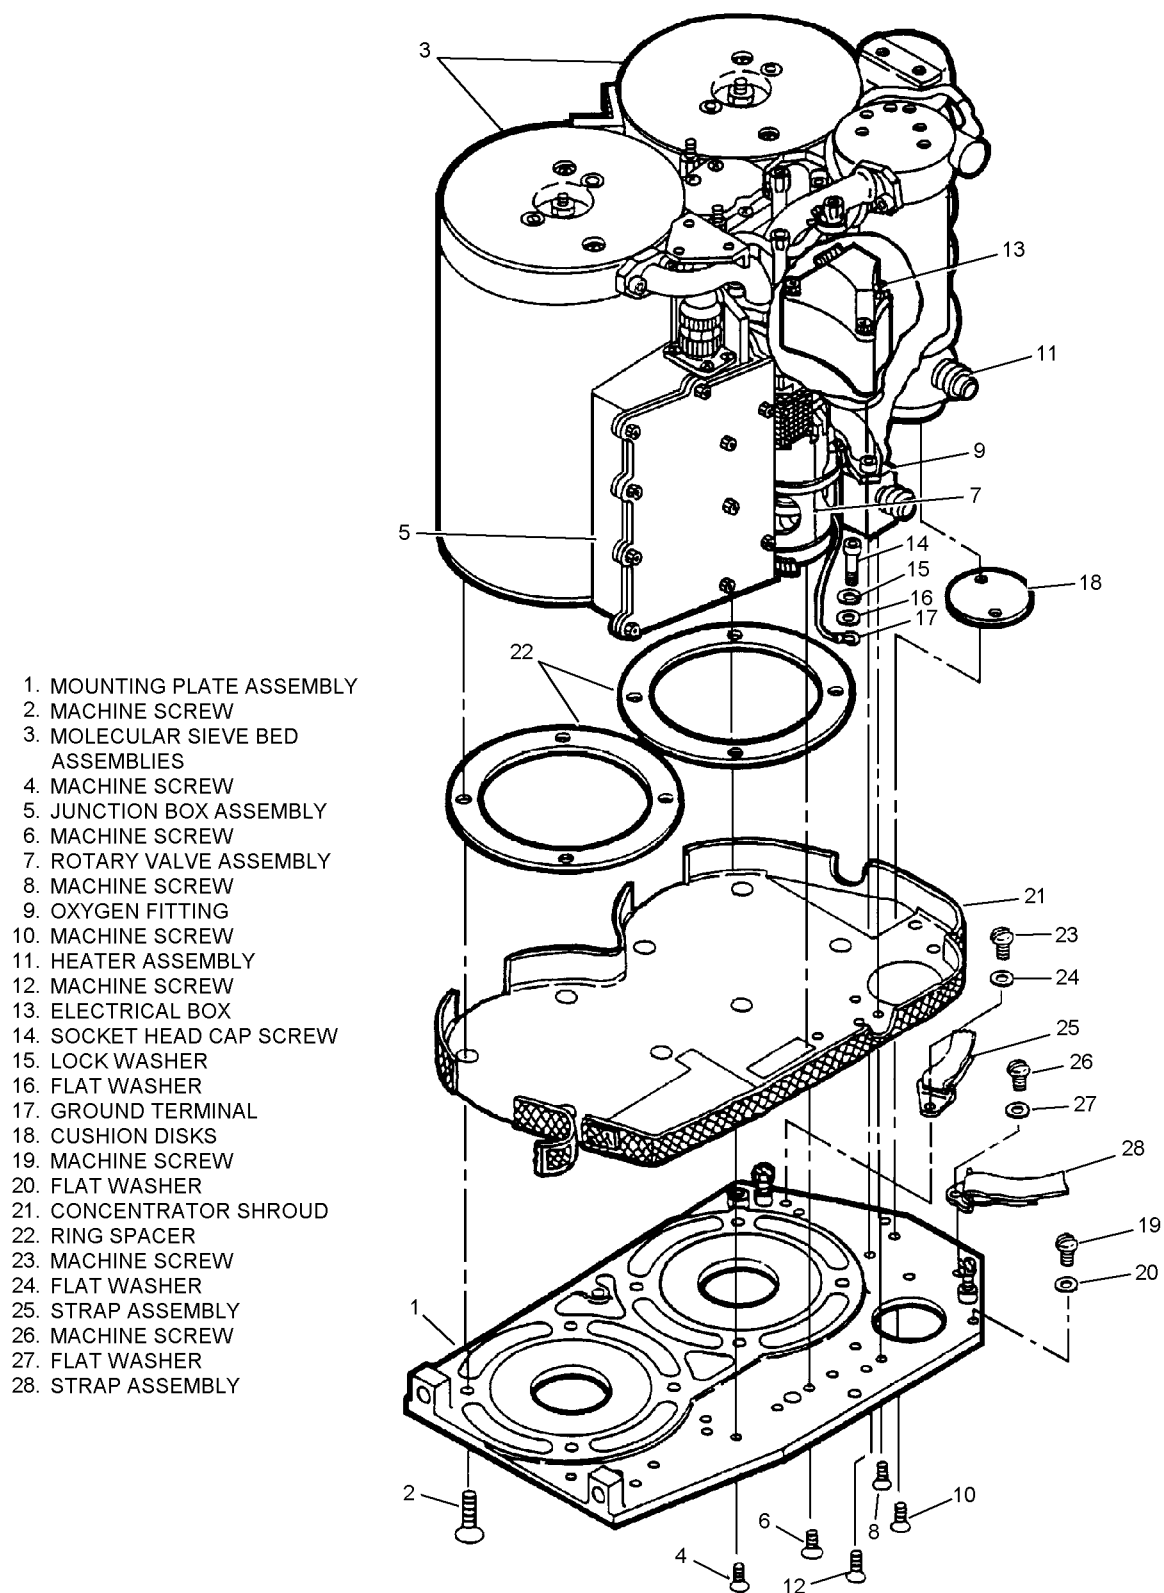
Shroud Assembly/Mounting Plate Removal/Assembly
